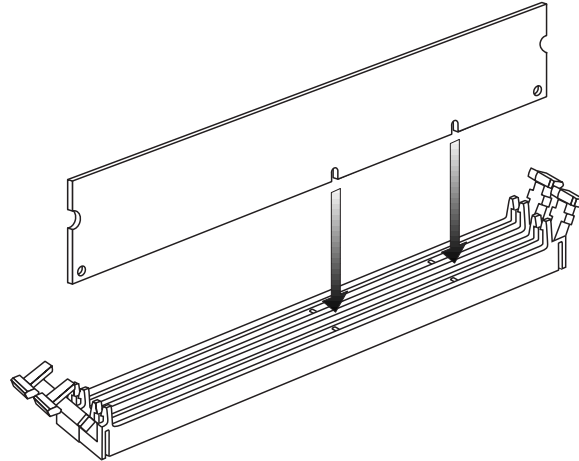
Insert DIMM module into connector with proper notch alignment
